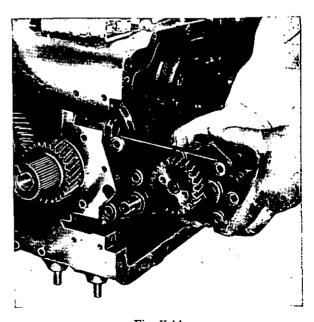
Removing Scavenge Pump. (Horizontal Engines only).
